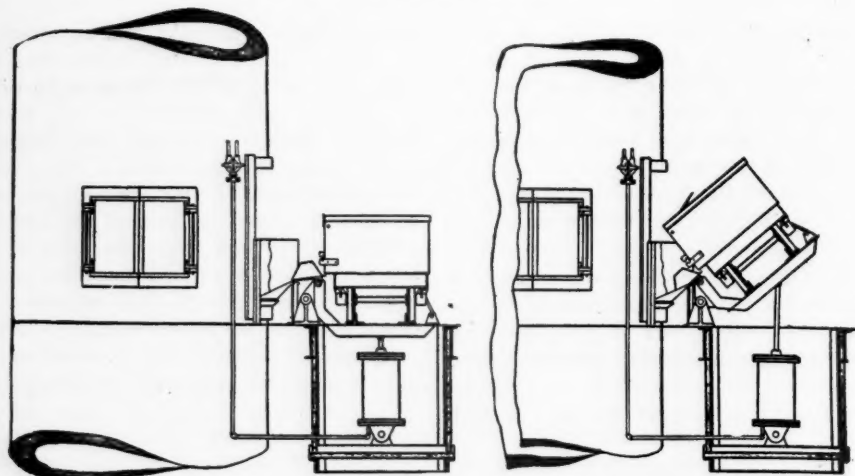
CUPOLA CHARGING MACHINE WITH CAR READY TO DUMP AND IN DUMPING POSITION.
